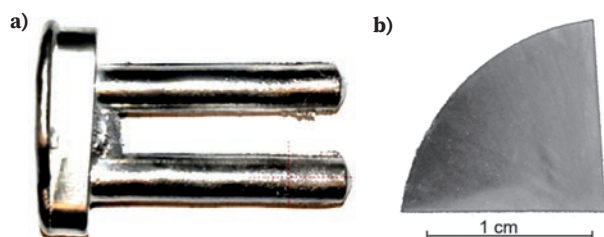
Co-20Ni-10Al-5Mo-2Nb-2Ti sample: a) cast rod, b) cross-section of the cast rod
